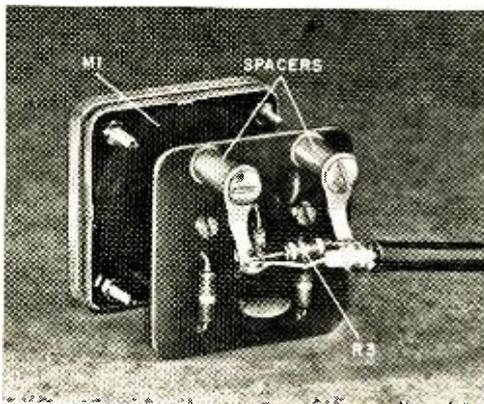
Mount foil side of printed circuit board facing meter. Photo shows how coaxial cable and R3 are connected for dummy load antenna operation.
